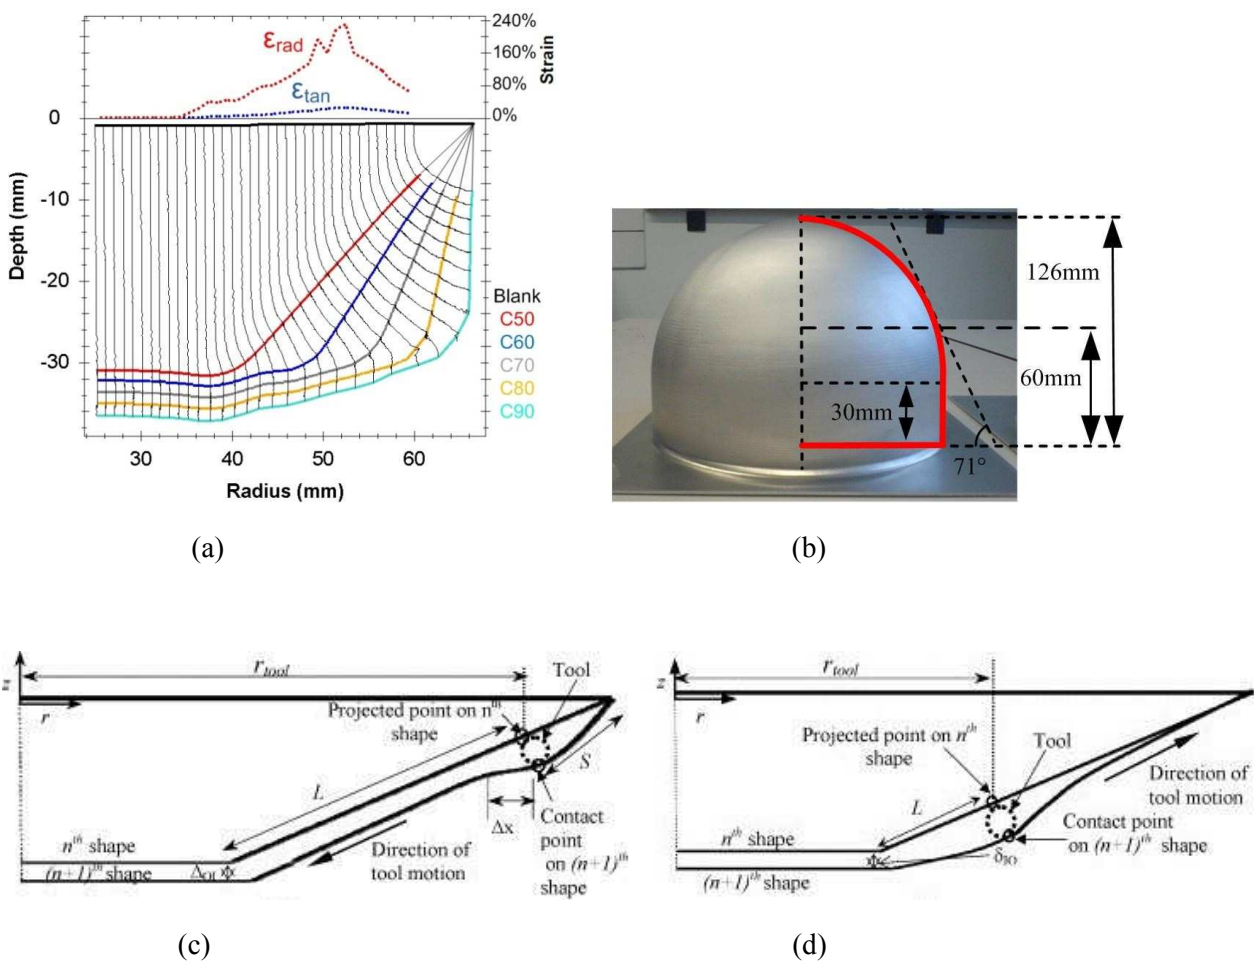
(a) Contours and strain distribution for a cone of 90 degrees made with multi-step toolpaths in five steps (b) a pressure vessel mold with cylindrical walls manufactured with this technique (right) [5, 43] (c) out-to-in toolpath (d) in-to-out toolpath [102, 103] [with permission from publisher]
